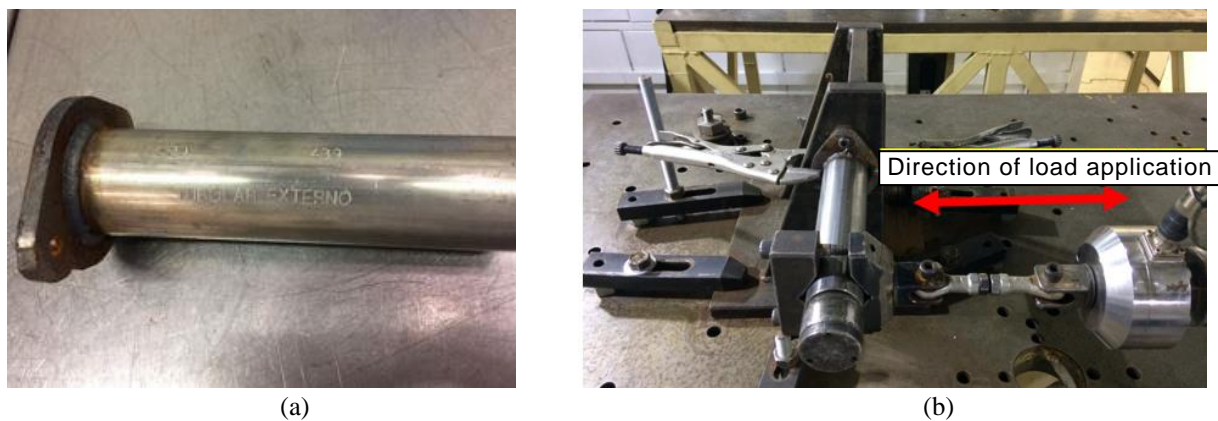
(a) Test piece aspect and (b) fatigue test configuration.
